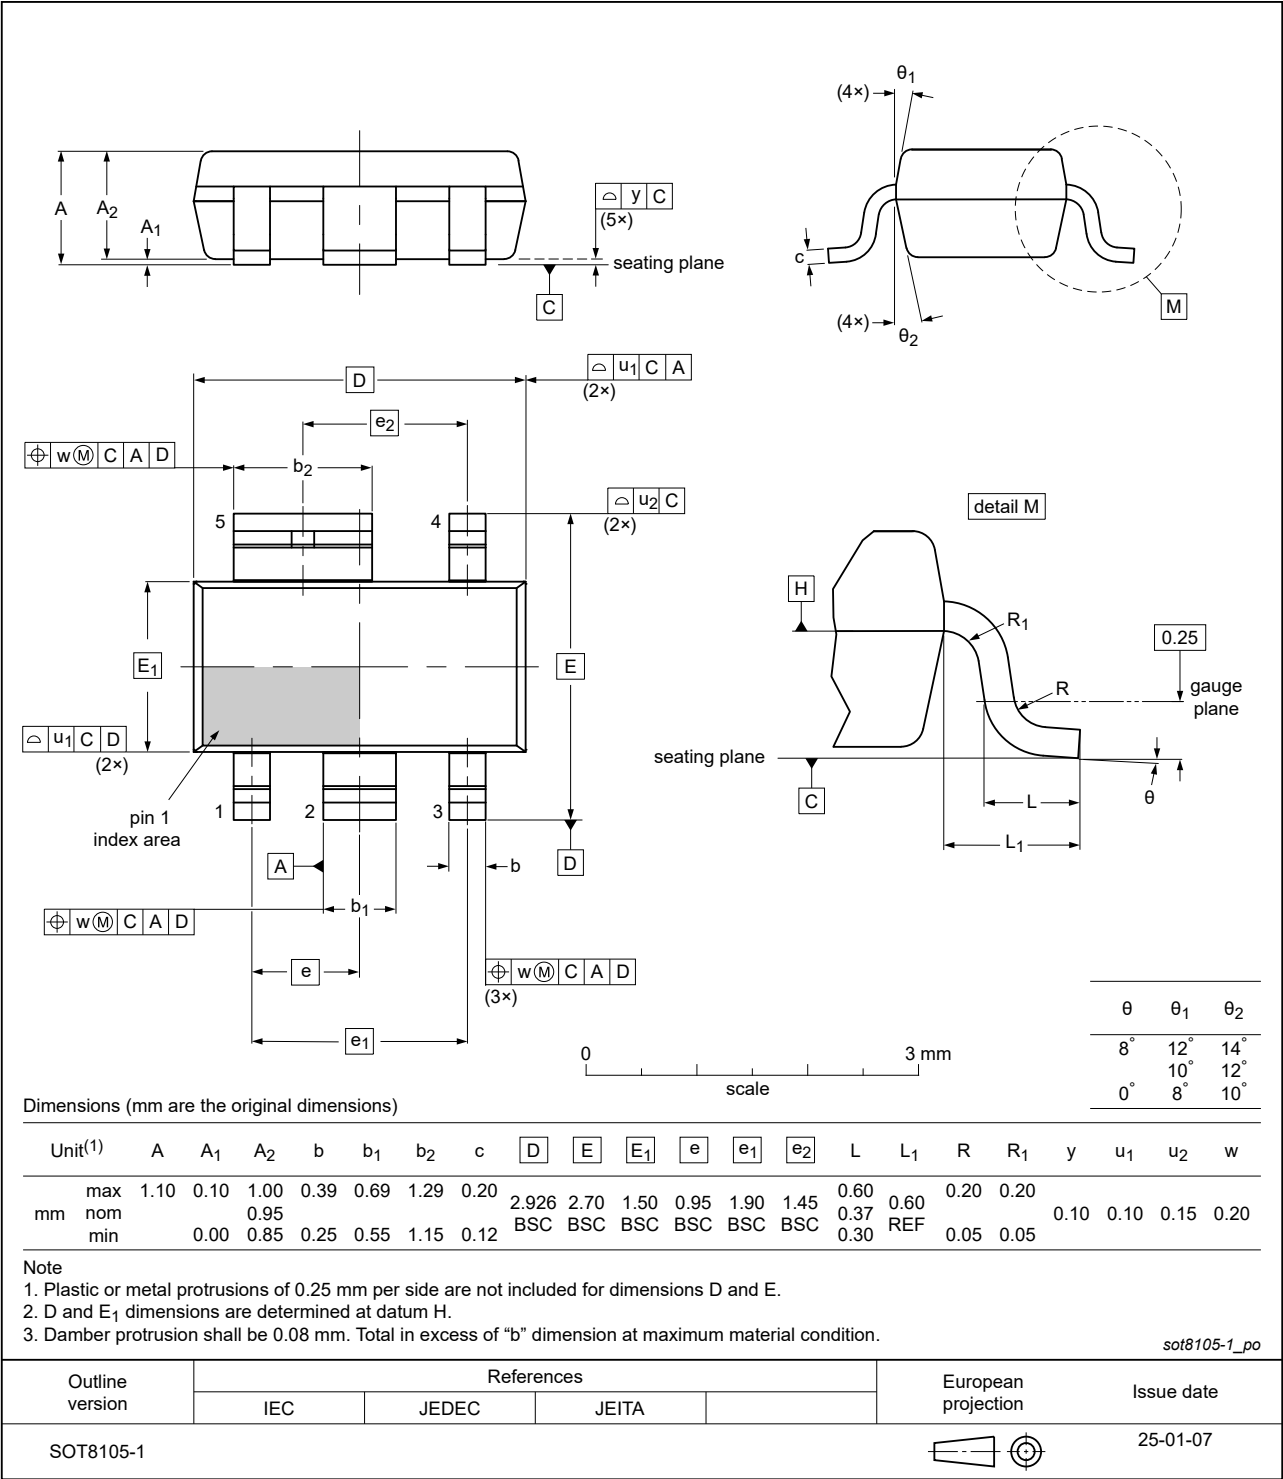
Package outline SOT8105-1 (SOT23-5S)
